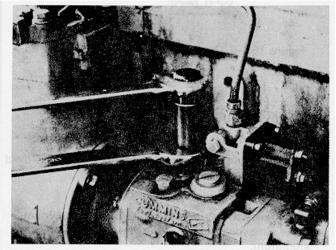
G-11. Removing Tachometer Drive Assembly with ST-1 326
